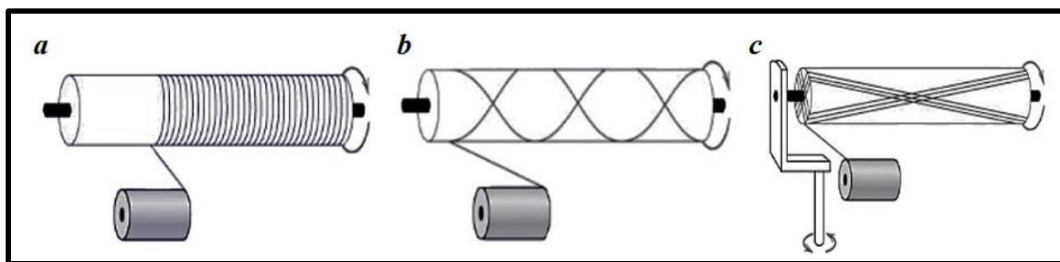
Different winding angles; a) hoop winding; b) helical winding; c) polar winding [39].
